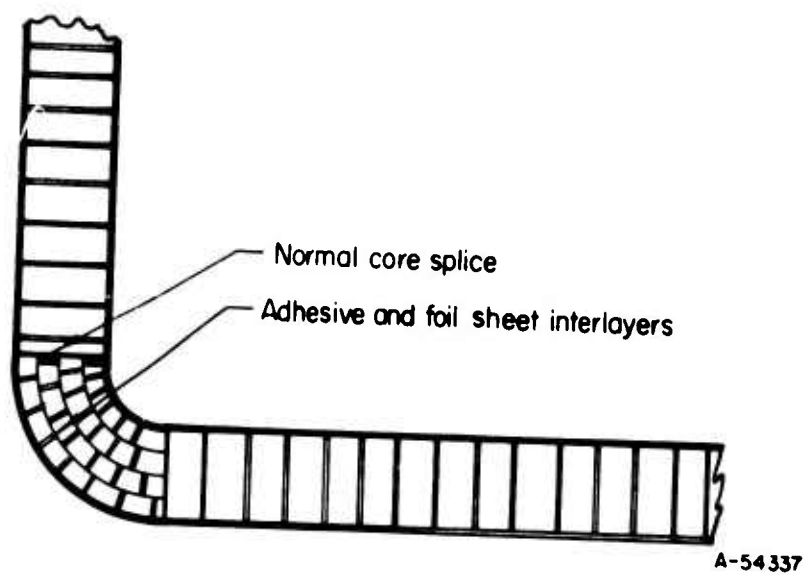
DESIGN FOR A HONEYCOMB EDGE JOINT (Ref.44)
